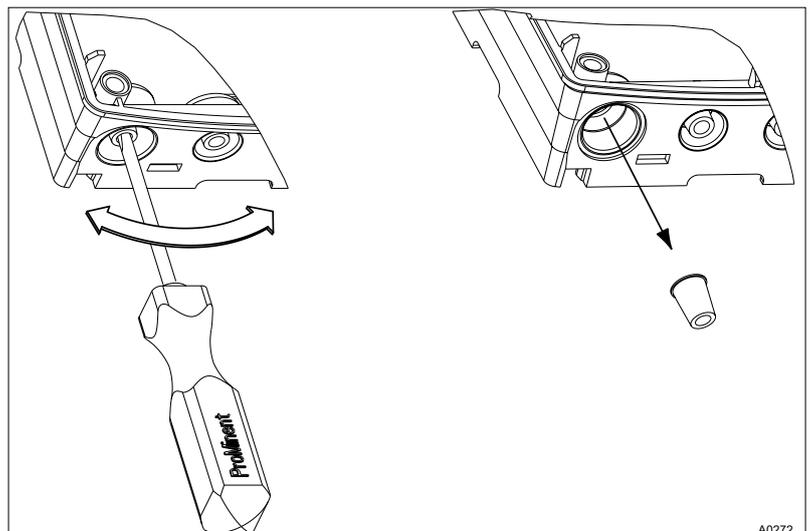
The large threaded cable connector (M20 x 1.5) is only for use with the coaxial cable.
